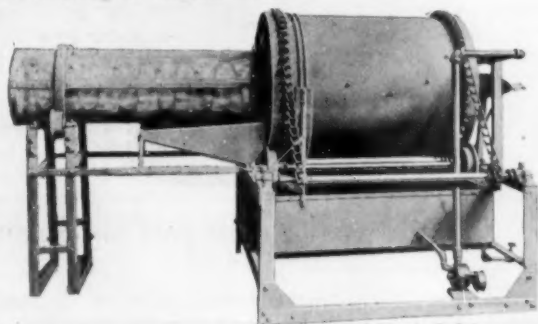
CONTINUOUS PROCESS MACHINE FOR REMOVING LIGHT GREASE.
